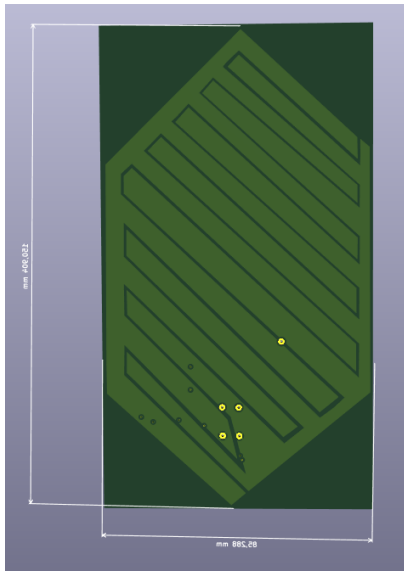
Design of complete PCB for the single electrode - patient sensing part
